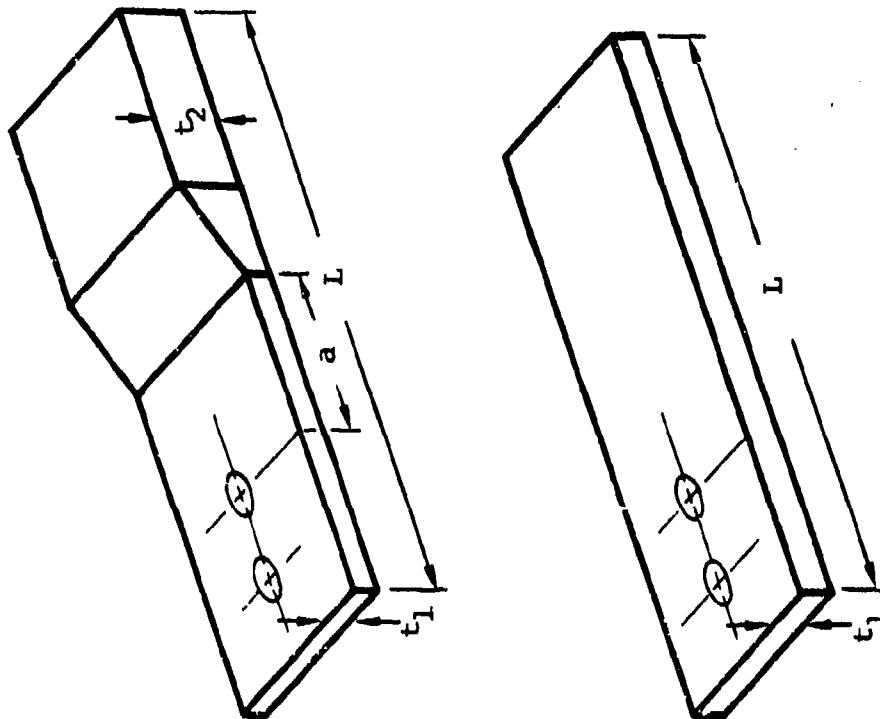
Dimensions of the Metal Plates for the Various Composite-To-Metal Multifastener Joints.
